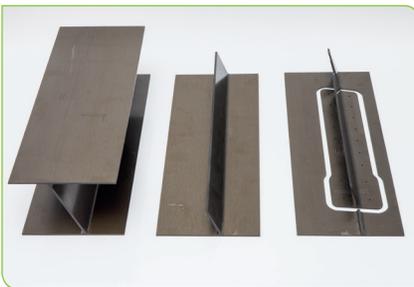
Manufactured CFRP component, segmented frame and final component developed by Embraer, Toho Tenax and DLR
